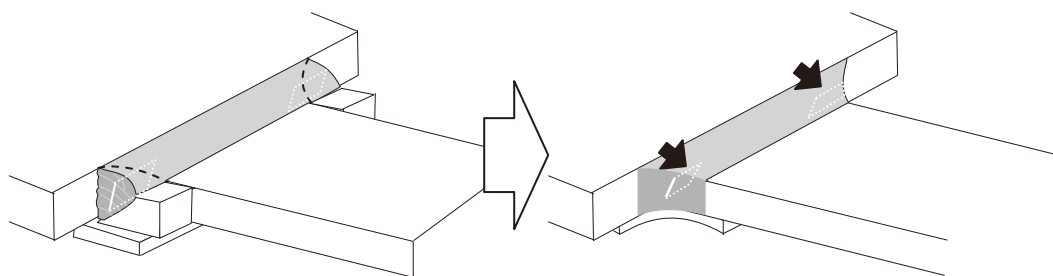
Solidification crack remained and exposed after cutting the steel end-tab at the weld edge
